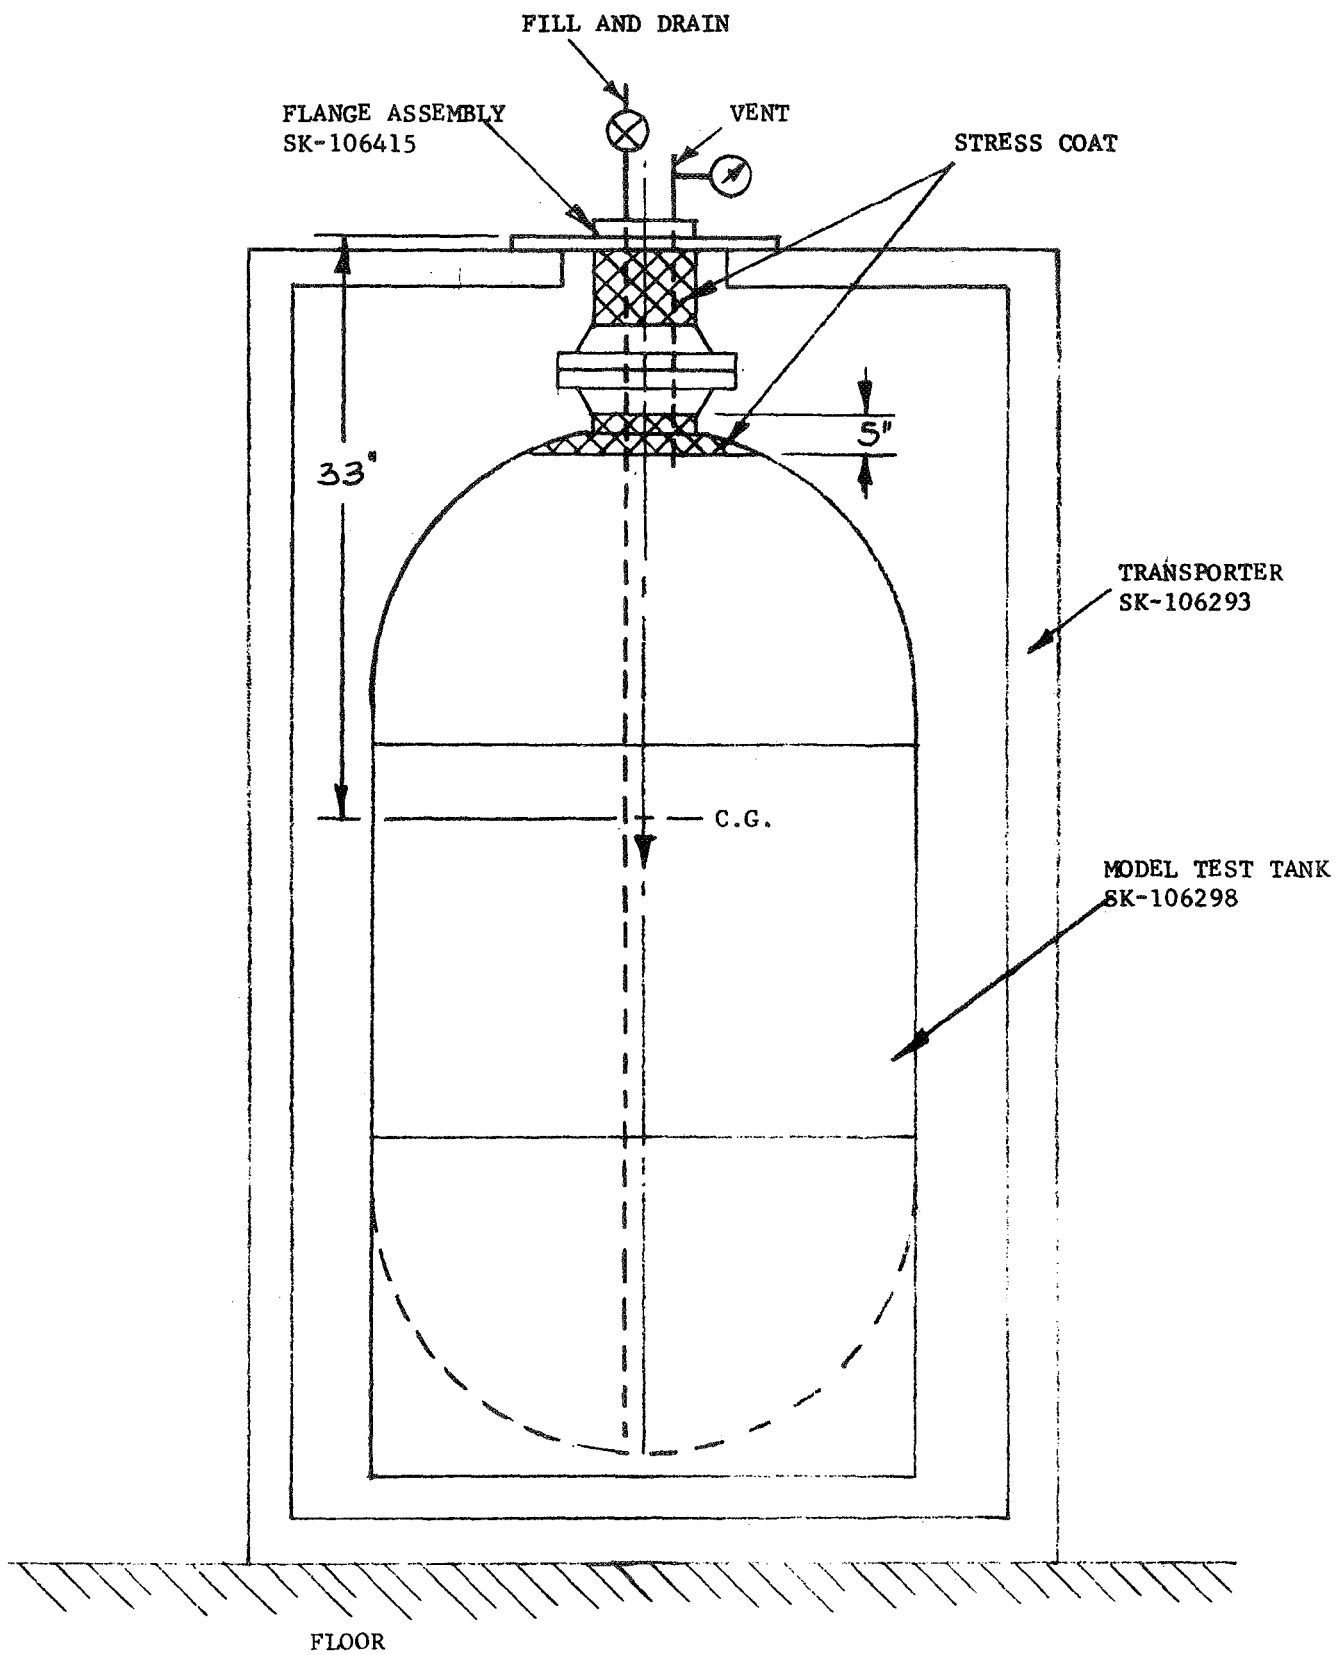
TEST SET-UP (AXIAL LOAD) FLANGE UP
